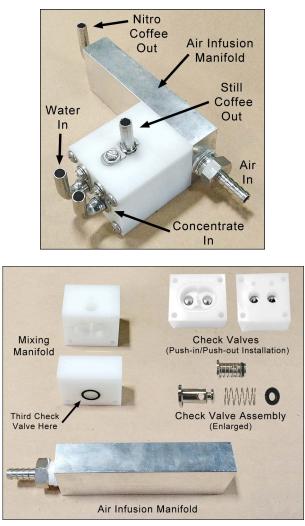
Mixing-Infusion Manifold & Check Valves
